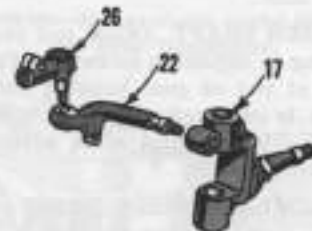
Knuckle (17), tie rod end (26) and steering arm (22) as used on some standard models.
